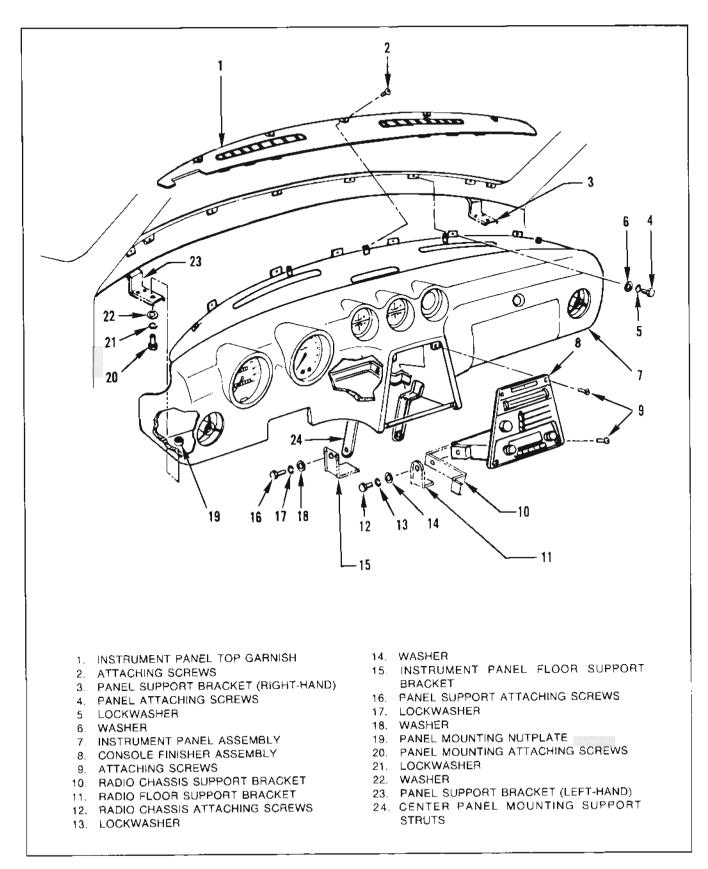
Instrument Panel Attaching Hardware (Exploded View)
